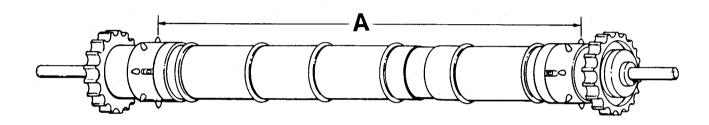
ADJUSTABLE PIN-FEED DRIVE ROLLER
